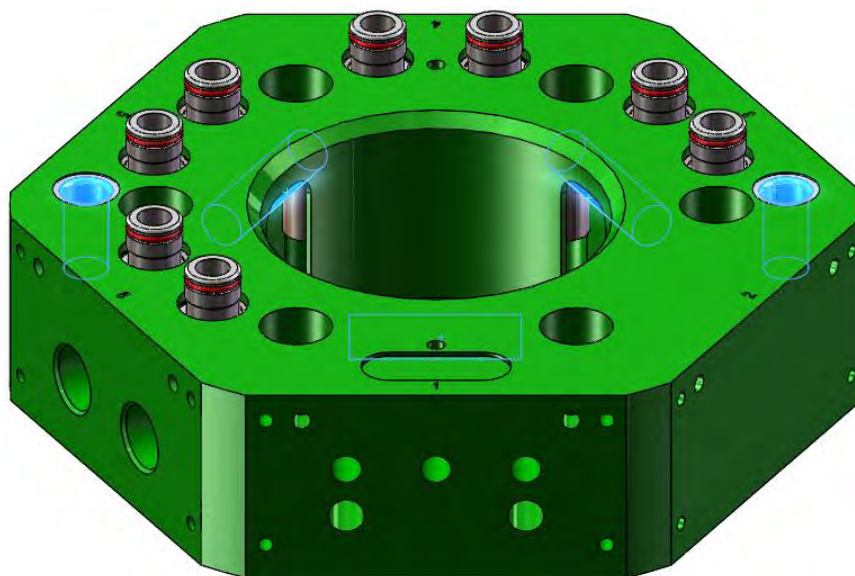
ET100 Tool Adapter Lubrication
